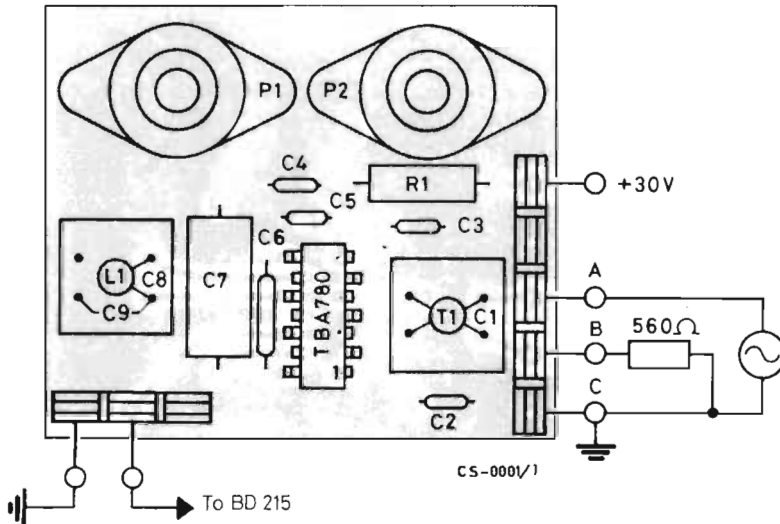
P.C. board layout, 1:1 scale (fig. 2 circuit)
